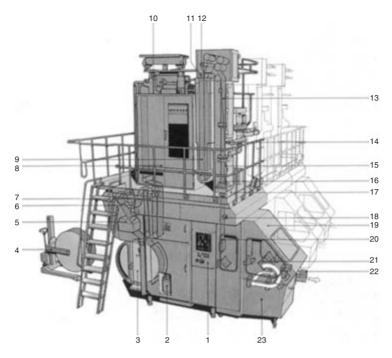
Machine functions. (1) control panel; (2) container for hydrogen peroxide, closed system; (3) reel of packaging material; (4) special trolley with hydraulic lift for handling packaging material; (5) automatic splicing equipment for packaging material; (6) date-stamping unit; (7) loops of packaging material, (these ensure a smooth, jerk-free feed and also allow continuous production when new packaging material is spliced in); (8) most of the machine's electrical system is located here; (9) the packaging material is sterilised in a deep bath of heated hydrogen peroxide; (10) strip applicator, which applies a plastic strip to one edge of the packaging material (later, at the longitudinal sealing stage, this is welded to the opposite edge, giving a tight and durable seal); (11) rollers, which remove the hydrogen peroxide from the packaging material; (12) nozzles for hot sterile air to dry the packaging material; (13) the packaging material starts to be shaped into a tube; (14) filling pipe; (15) element for the longitudinal seam that welds together the two edges of the packaging material; (16) 'short-stop' element that completes the longitudinal seam when the machine restarts after any brief halt in production; (17) the TBA/8 is designed so that two or more machines can be linked to form compact production units sharing a common platform; (18) photocells, which control the machine's automatic design correction system; (19) casing, which can be raised and lowered, covering the automatic external cleaning system and the final folder, where the top and bottom flaps are folded over and sealed on to the package; (20) the packages are sealed beneath the surface of the liquid using induction heat (the heat comes from jaws that also shape and cut off the packages); (21) in the final folder the top and bottom flaps are sealed on to the package in two lines; (22) discharge of the finished packages; (23) bath, which fills with water and detergent automatically for external cleaning of the machine.
